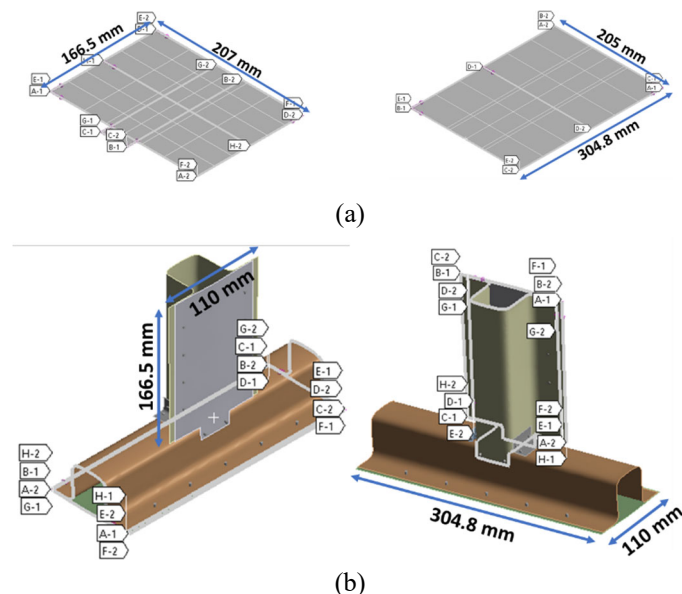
EXAMPLE OF THE WELD PATTERNS ON VARIOUS COMPONENTS OF THE ASSEMBLY
